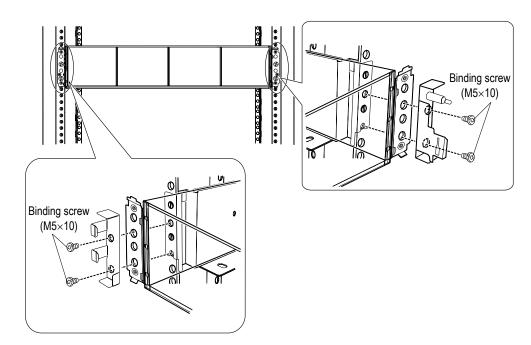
Removing the Front Side of the "Chassis ① (CBSL/CBSS)" (Controller Box)
